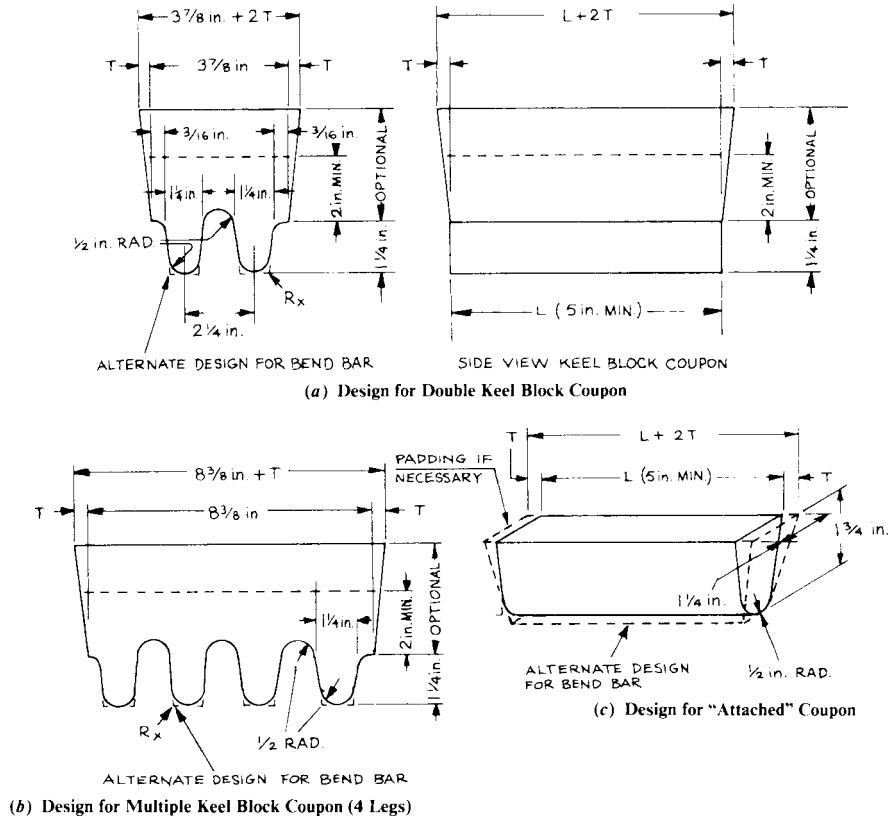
Test Coupons for Castings (see Table 1 for Details of Design)
